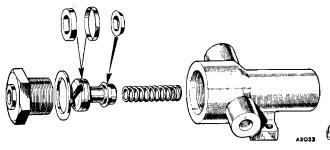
The hydraulic pressure regulating valve components Morris Mini-Minor. Issue 4. 32303
